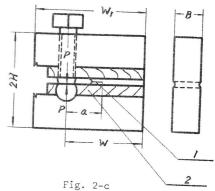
The way of sampling. 1 Fatigue crack. 2 Weld metal. 3 Fusion line.
